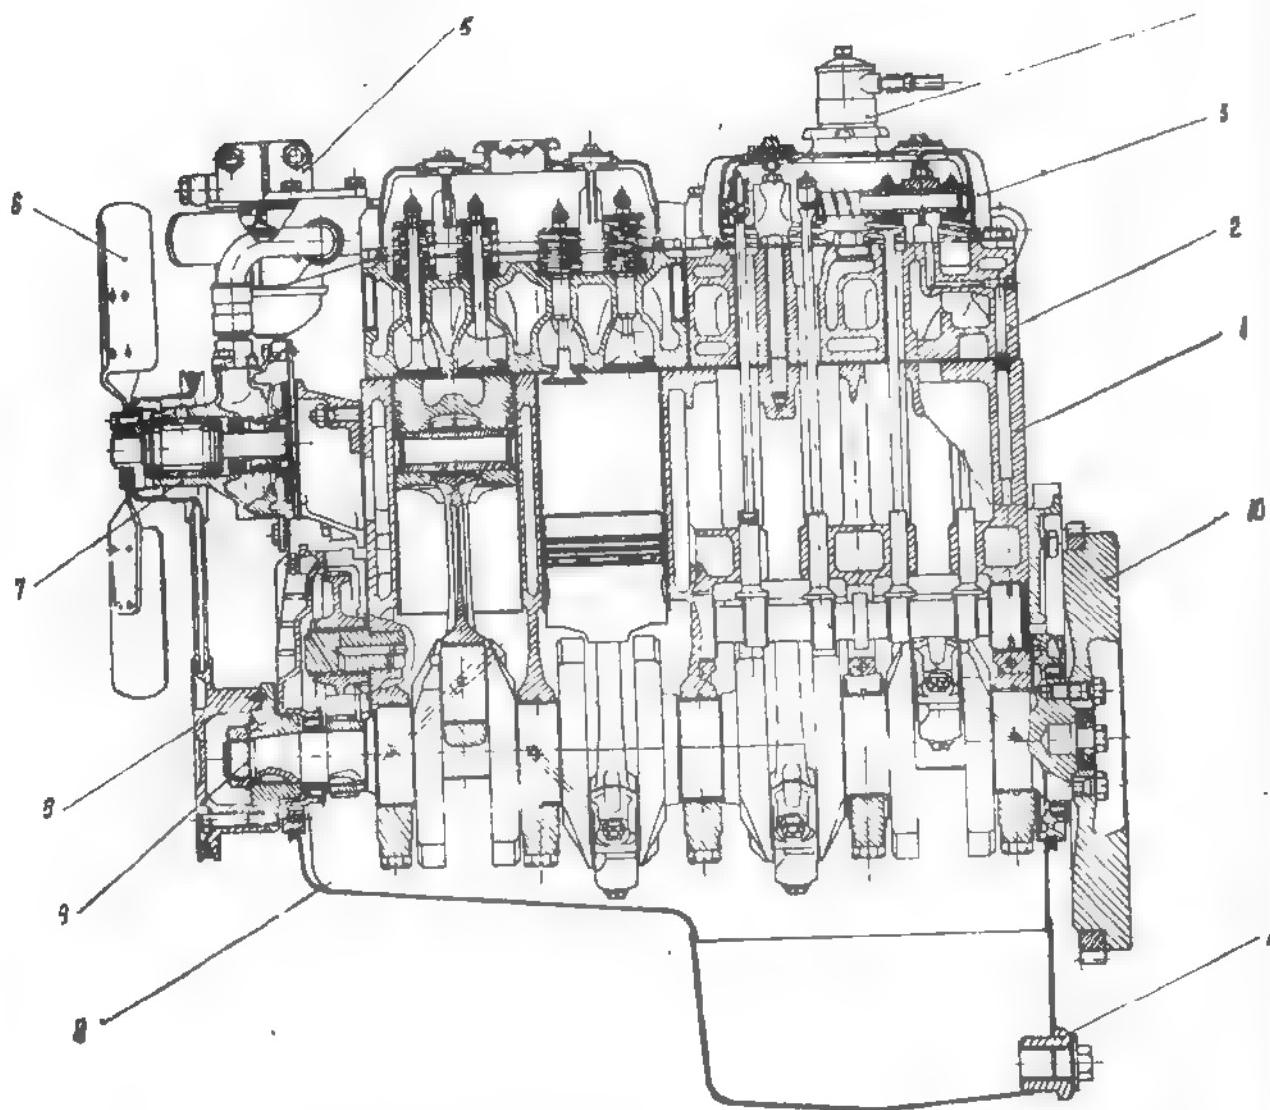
69. LONGITUDINAL SECTION OF ARO D-127 DIESEL ENGINE
